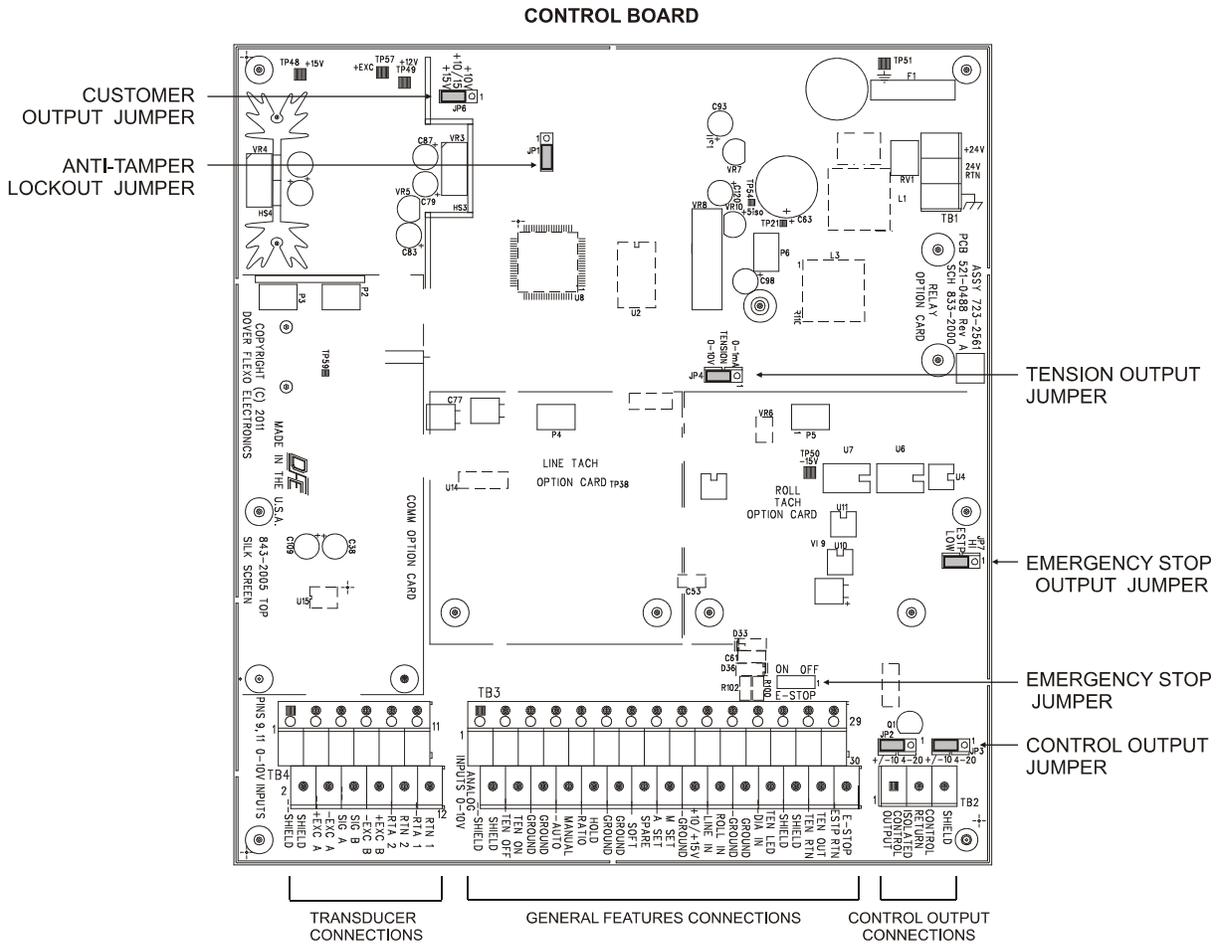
CONTROL BOARD SHOWING JUMPER LOCATIONS
